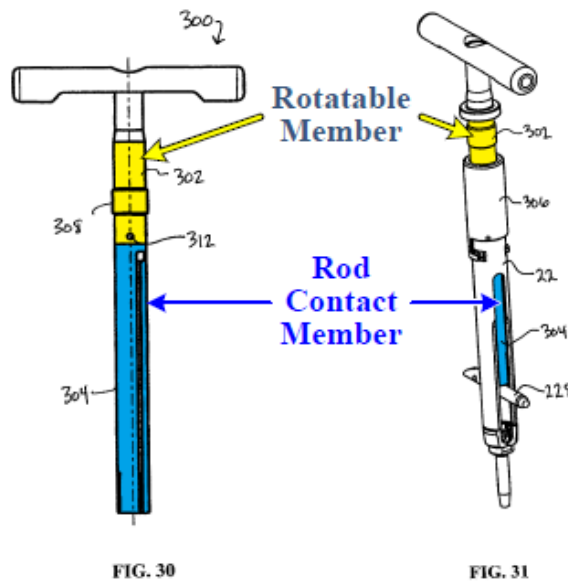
(left) is an annotated side view of a rod reducer assembly and Figure 31 (right) is an annotated perspective view of assembly. Ex. 1001 ¶ 44–45. According to Petitioner, “[a]s shown in FIG. 31, the reducer shaft 304 (*i.e.*, the claimed *rod contact member*) contacts the stabilization member 228 (*i.e.*, a rod) and thus is a rod contact member.” Pet. 16.
